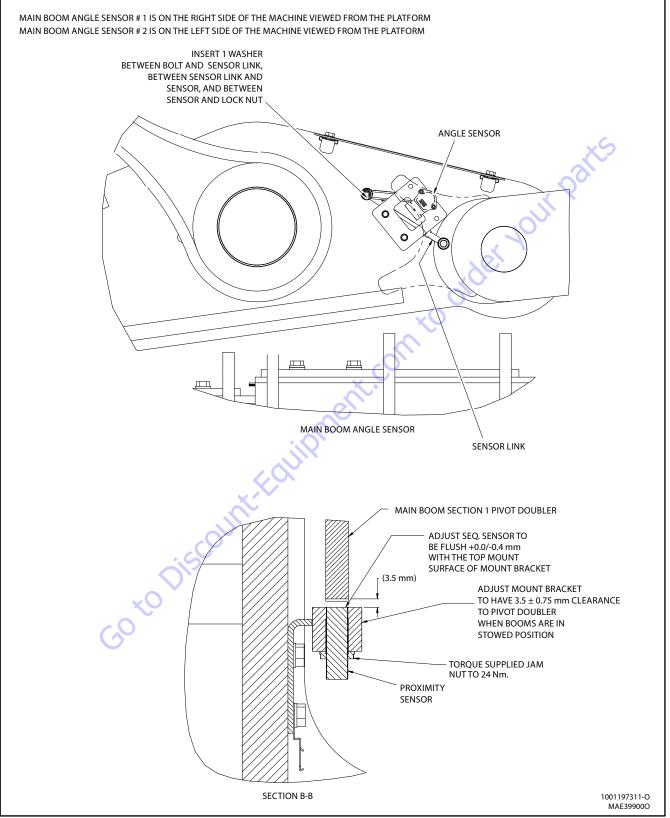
Boom Sensors Installation - Sheet 7 of 13
